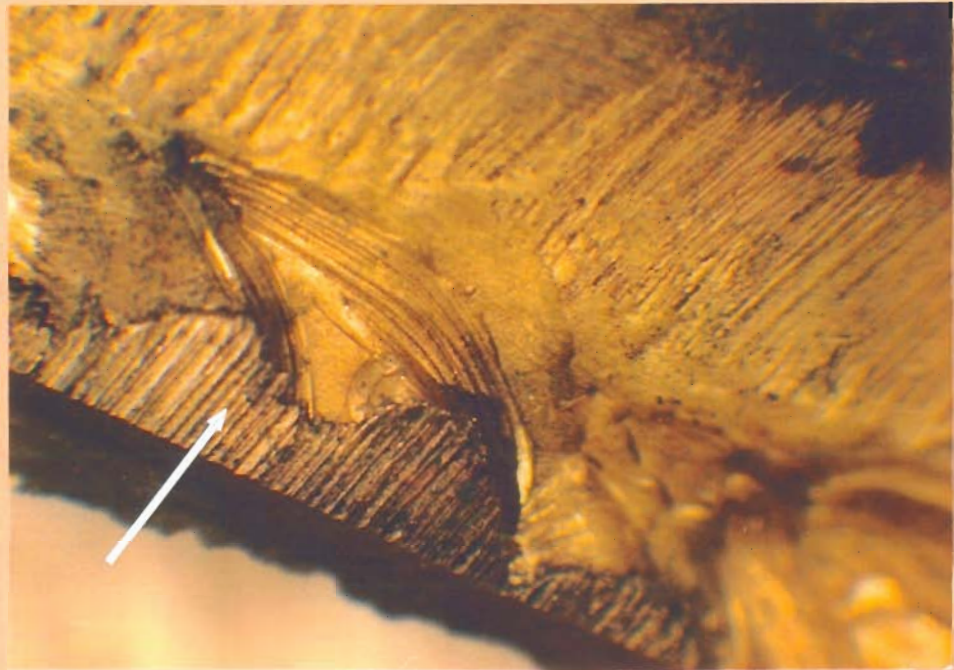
Grinding Marks Remaining on Bevel Surface of Circumferential Weld
